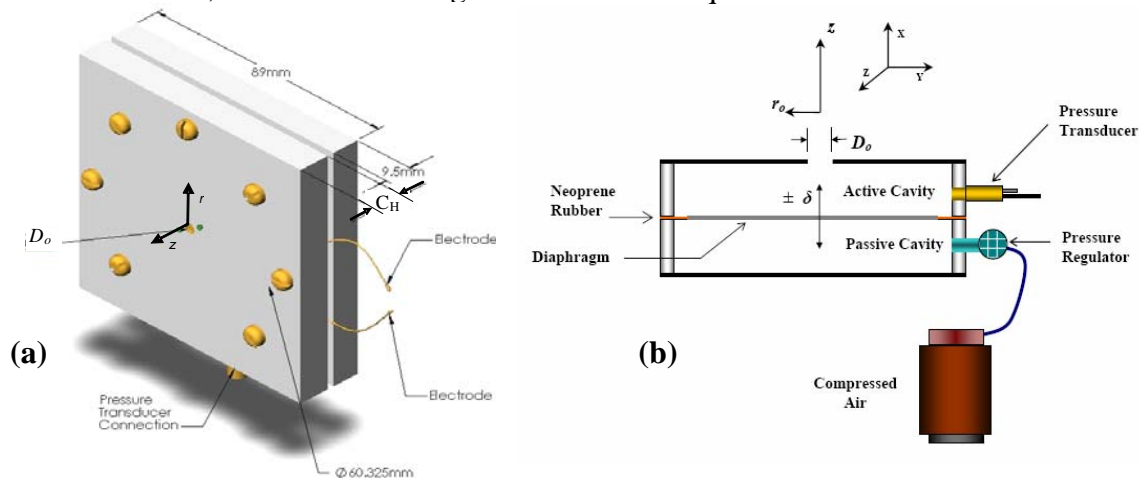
Synthetic Jet Cavity Assembly (a) Final Assembly, (b) Pressure Setup
